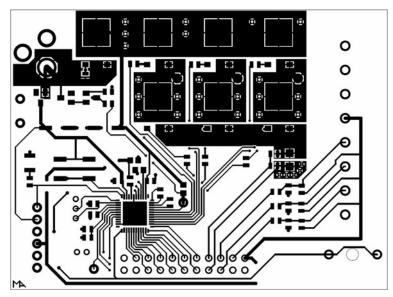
Application Basis Board Bottom Side (Top View) PCB Layout ATA6833/ATA6834-DK1
